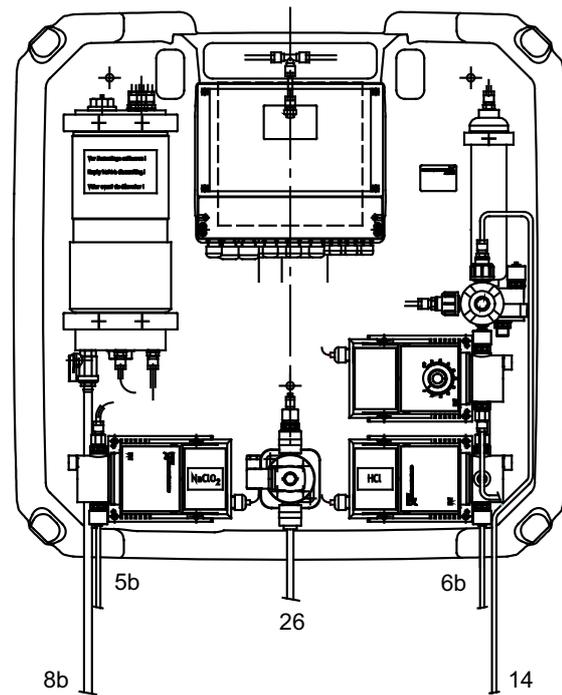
Oxiperm Pro (OCD-162-5, -10) hydraulic connections
